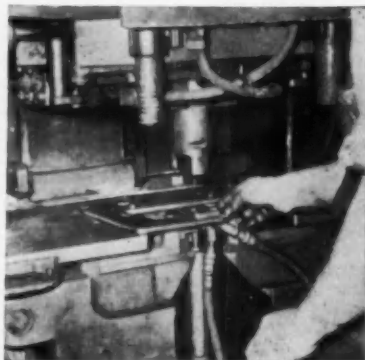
Close-up of simple tooling required for a baler pick-up crank assembly.
